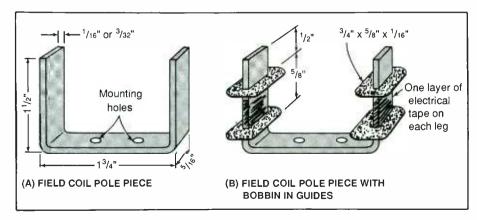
Machining details for field-coil piece (A) and optional bobbin guides (B).
